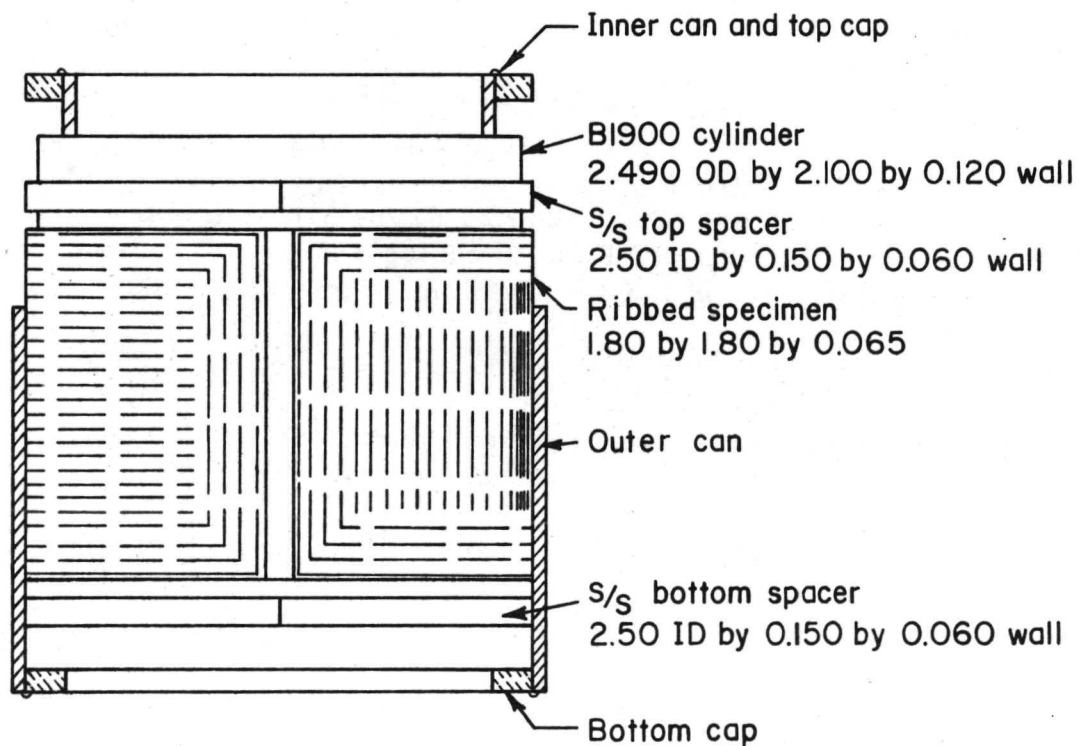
CYLINDRICAL SPECIMEN ASSEMBLY
